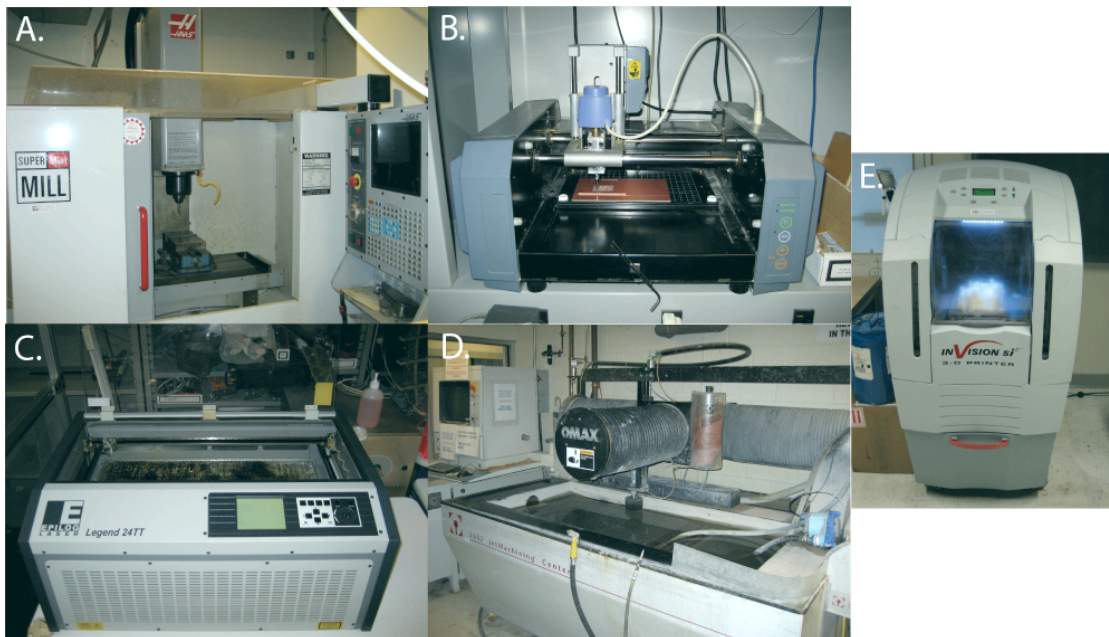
A Posse of Rapid Prototyping Machines: A.) CNC Milling Machine, B.) Desktop Modeler, C.) Laser Cutter, D.) Waterjet Cutter, E.) 3D Printer
